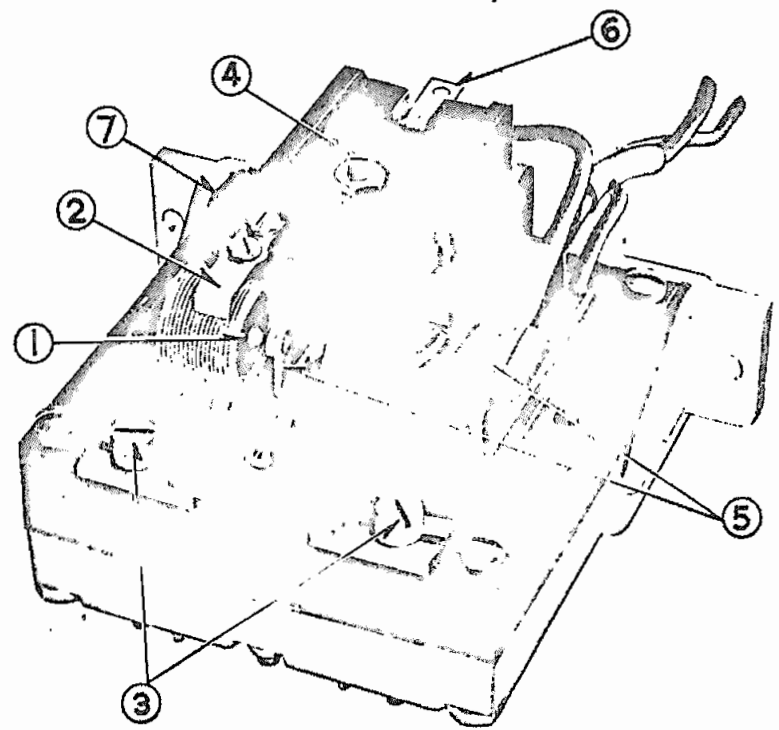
Directional Unit. 1-Stationary Contact. 2-Stationary Contact pressure spring. 3-Magnetic adjusting plugs. 4-Upper bearing screw. 5-Moving element assembly. 6-Spring adjuster clamp. 7-Current Bias Vane.
